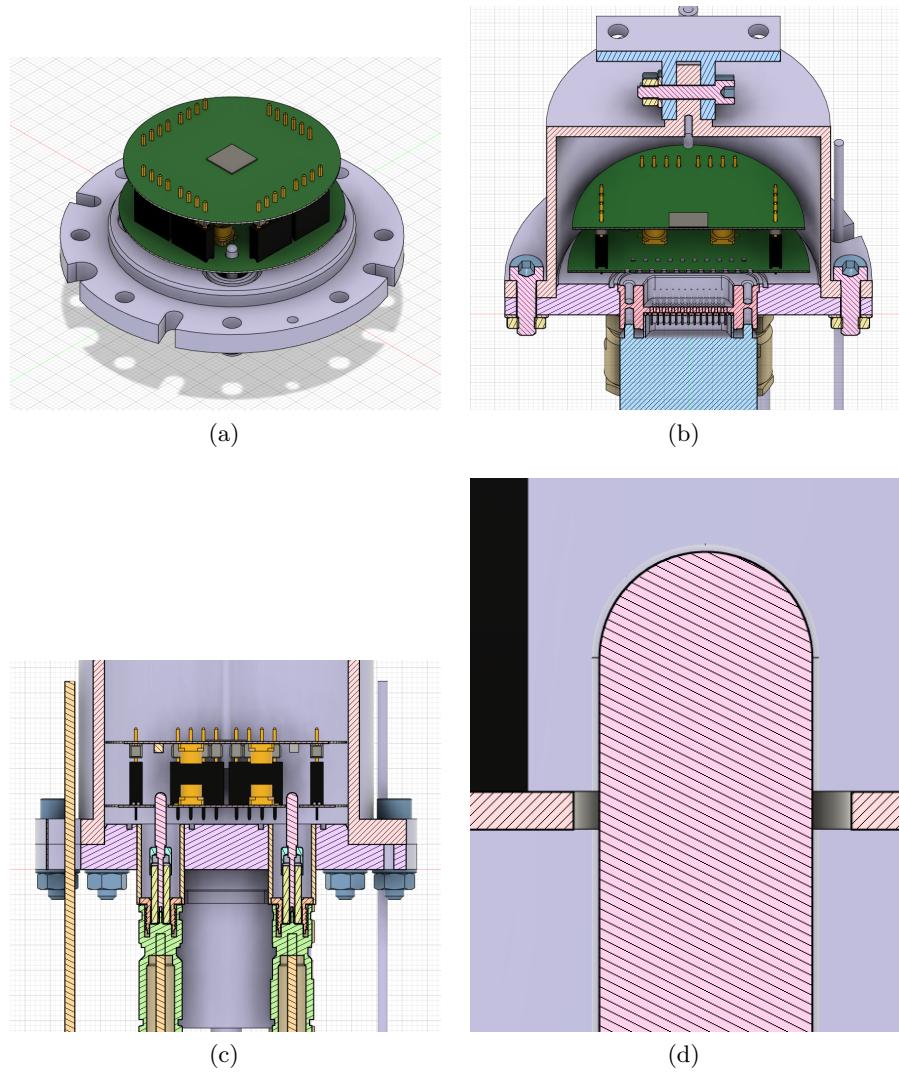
Assembly of the PCBs inside the hermetic cell. The render in (a) shows the boards mounted onto the bottom of the cell, and in (b) a slice through the assembly showing how the boards fit into the cell and how the 31-pin connector in the cell aligns with the holes on the Motherboard. The render in (c) shows a slice through the assembly depicting the alignment of RF pins with the holes in the Motherboard, and in (d) a close-up of an RF pin and the mounting hole in the Motherboard.
